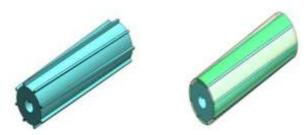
Rotor skewing ($\emptyset = 250$)
